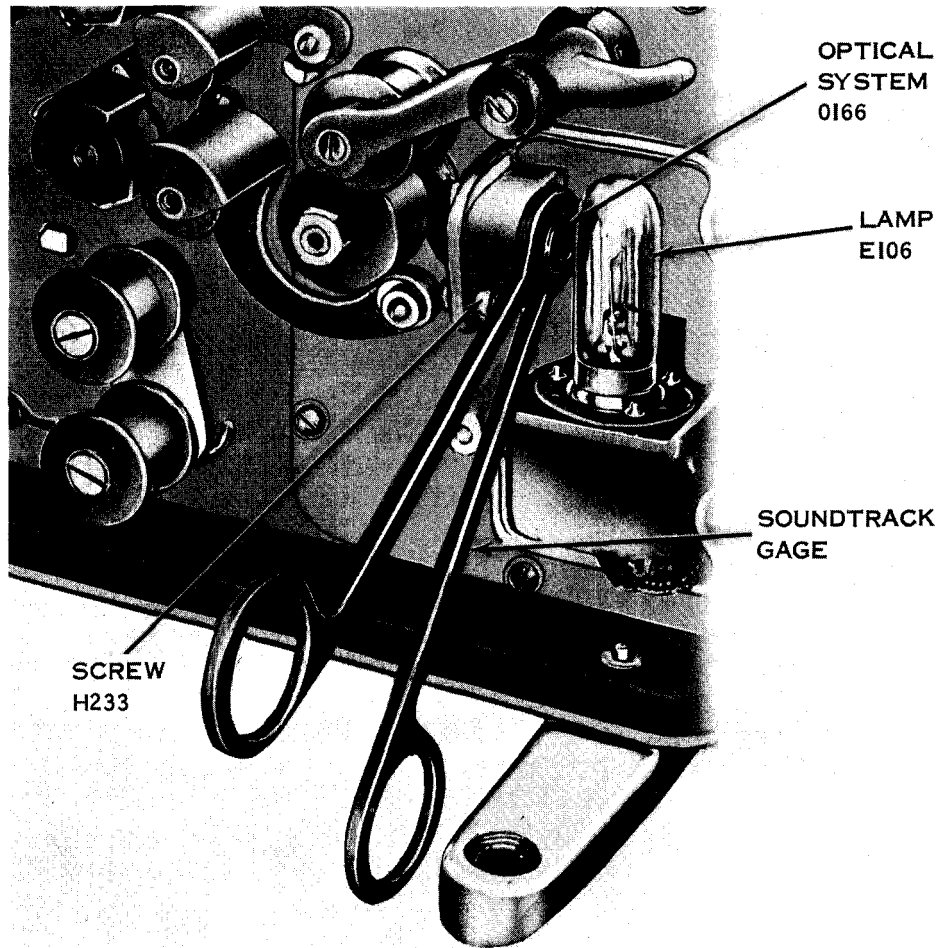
Adjusting position of sound drum. (roller 0216) with soundhead gage.
